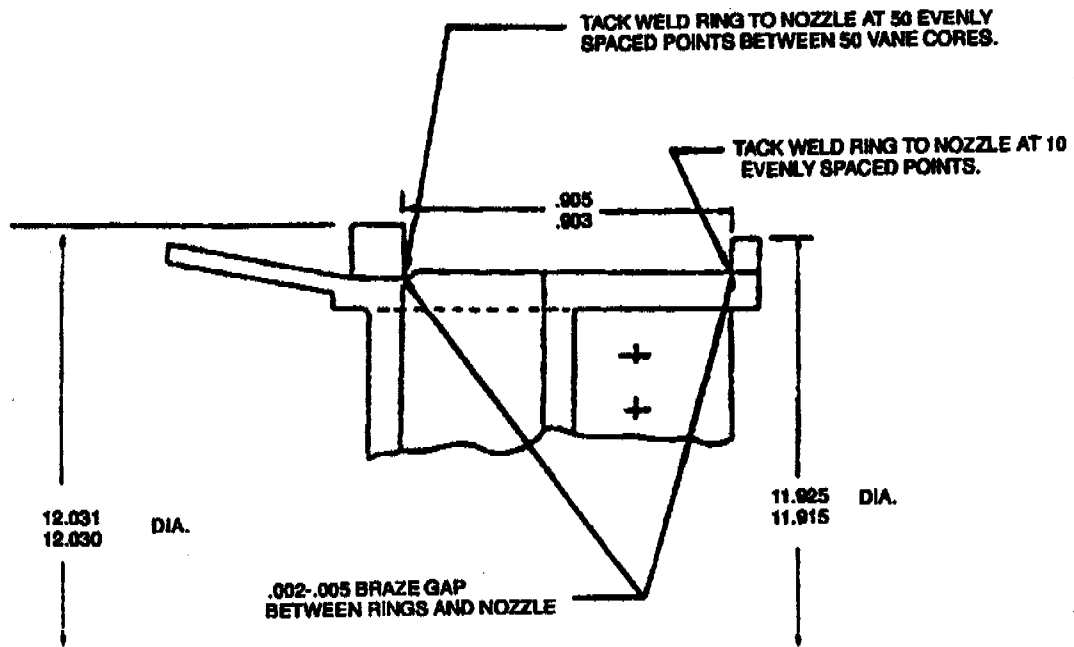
Positioning and Tack Welding of Rings to Outer Shrouds.
